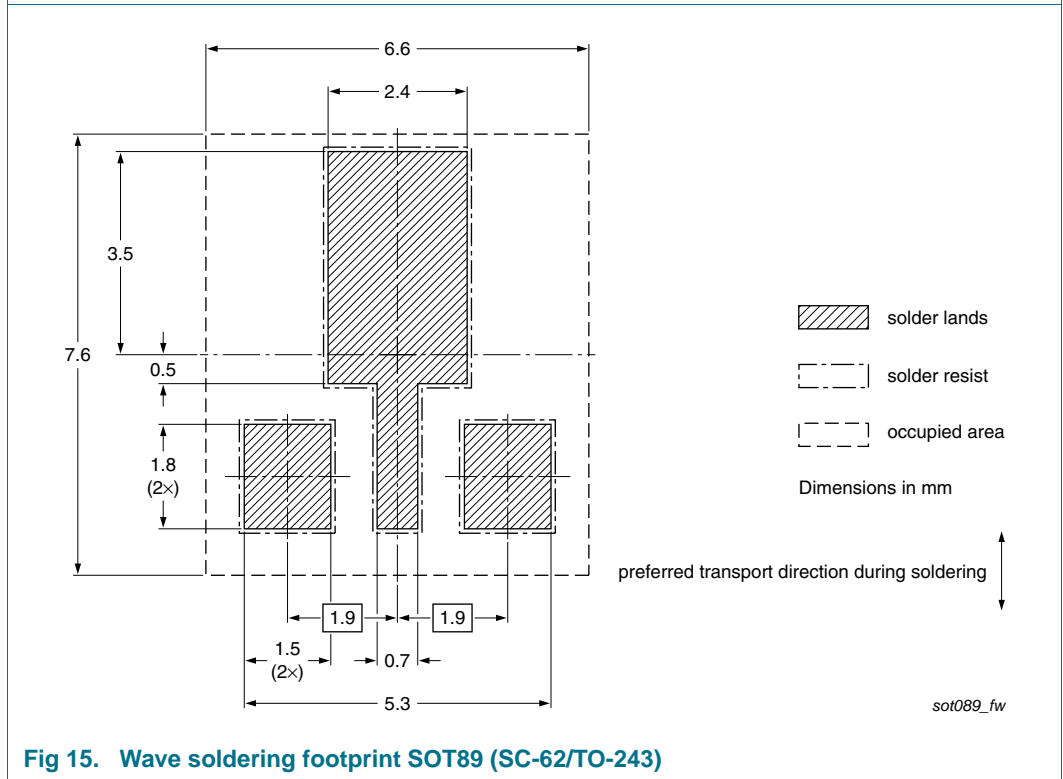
Wave soldering footprint SOT89 (SC-62/TO-243)
